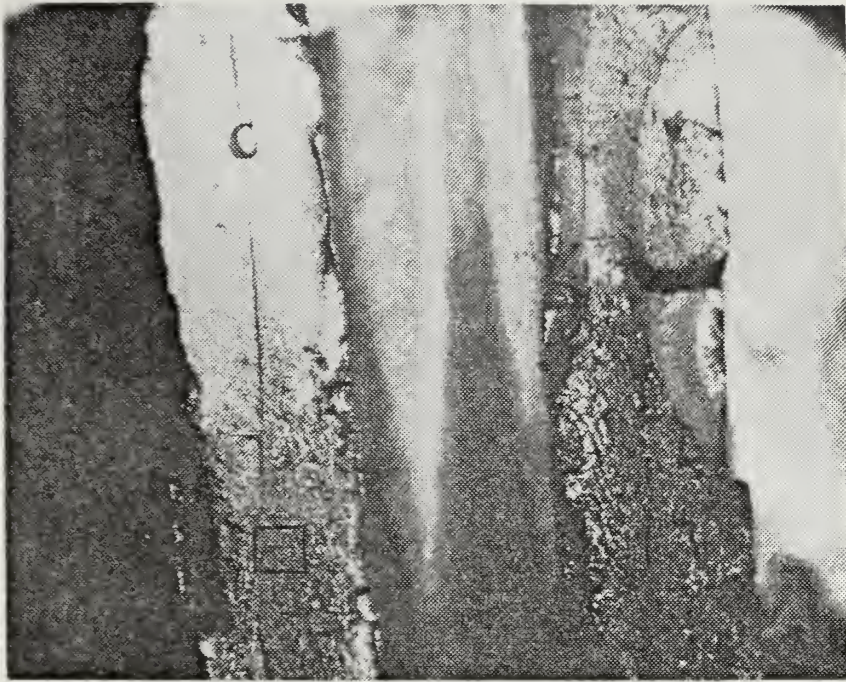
Macrograph of fatigue-fracture surfaces for specimen AR-2-1, fractured after 7,600 cycles at 100 ksi, showing several sites of fracture initiation. X10.
